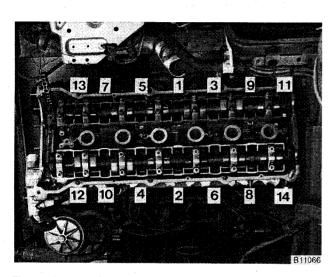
Cylinder head bolt tightening sequence for M50 engine.
